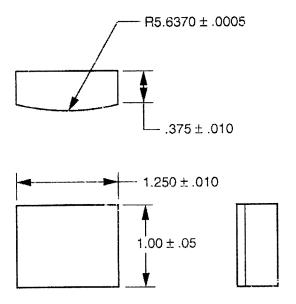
Lower convex inspection fixture pressure pad.
